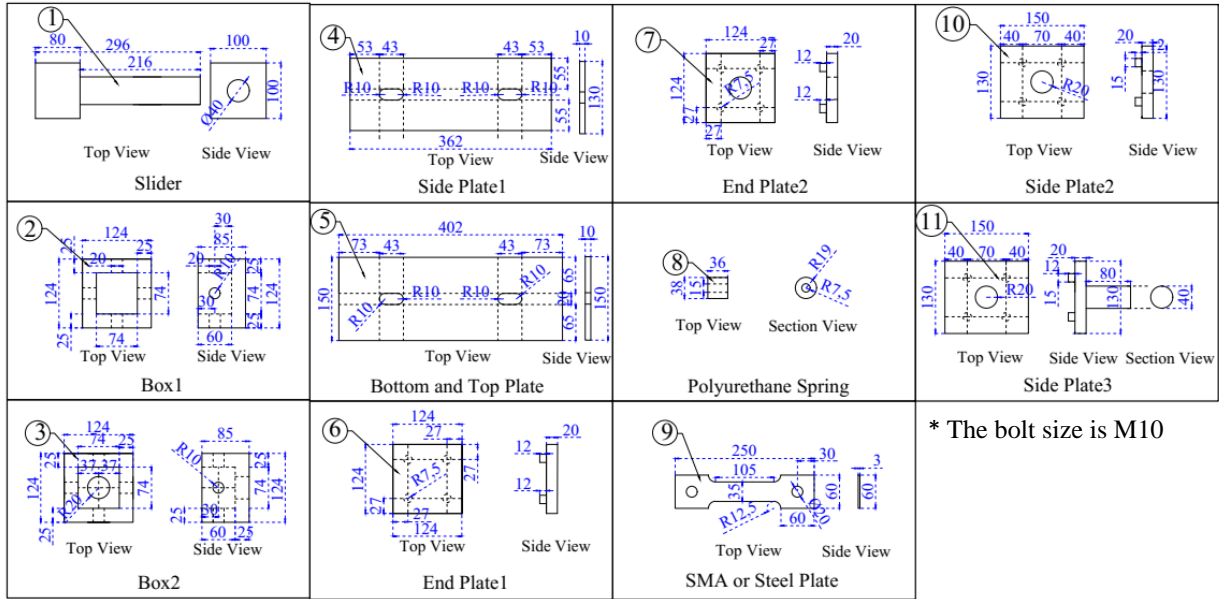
Design of the recentering axial damper with the friction devices (all dimensions in mm)
